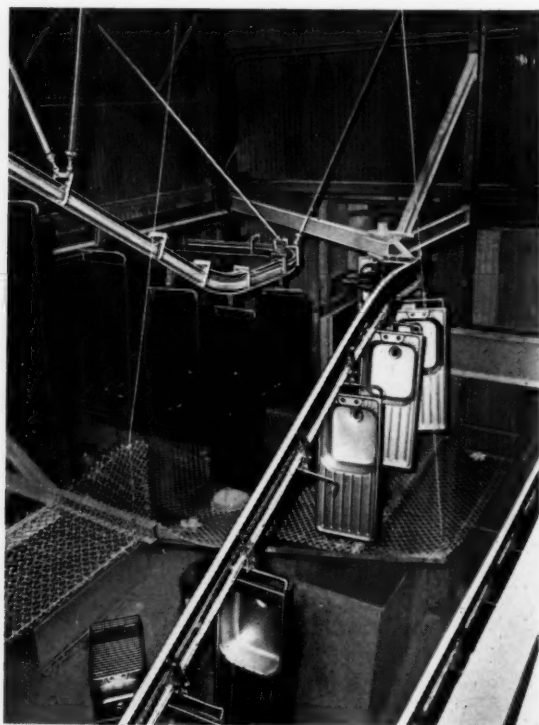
Conveyor No. 3 at Nottingham Road works taking shot-blast pressings from the shot blast to the ground floor
